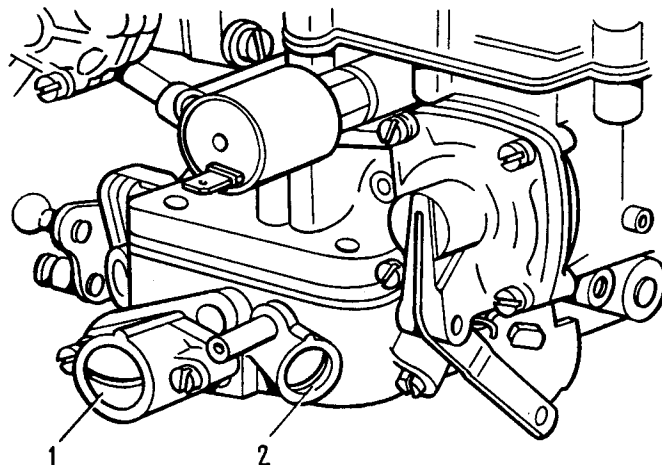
Idling System Adjusting Screws in Carburetors 2107-1107010-10 and 2107-1107010-20:
